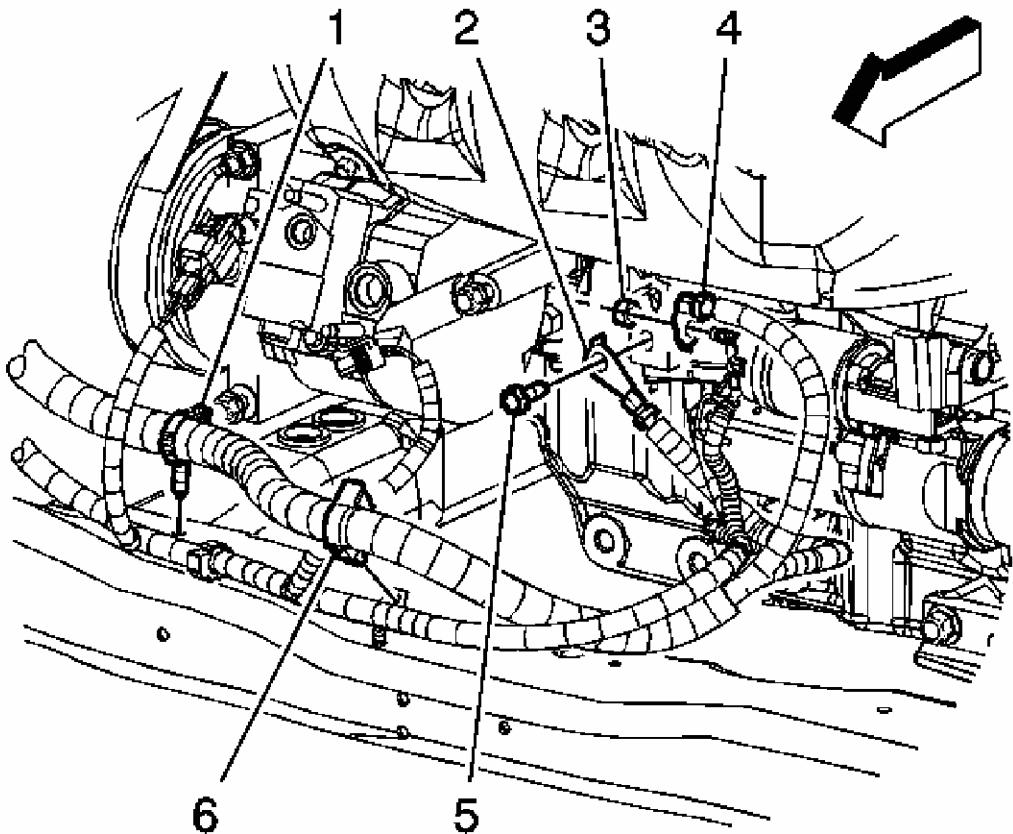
Identifying Starter Solenoid & Starter Motor Cable Terminals
